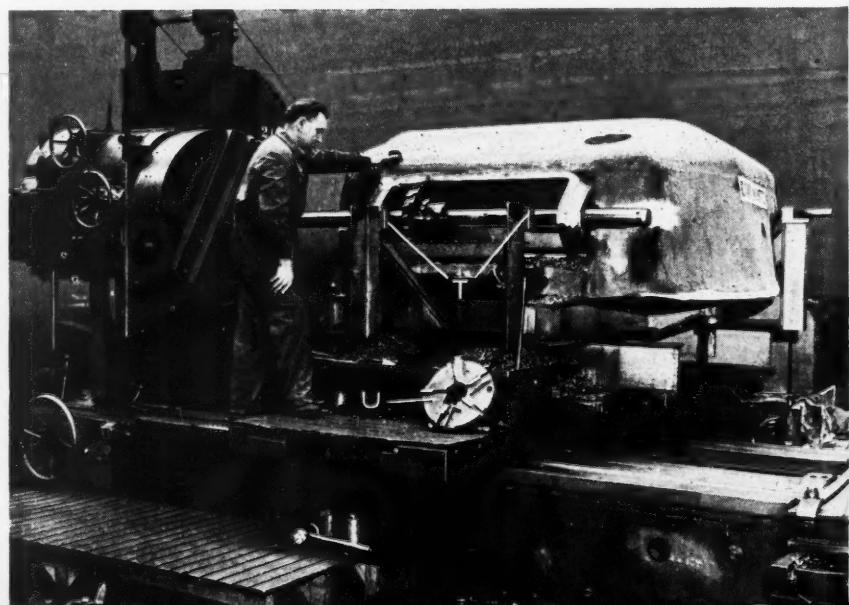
Upper and lower surfaces of the mantel aperture in the tank turret are machined on a horizontal boring machine
